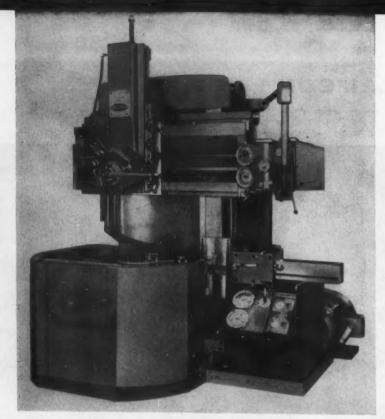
Bullard 36-inch Dynatrol lathe with Size-Au-Trol on turret side-heads
